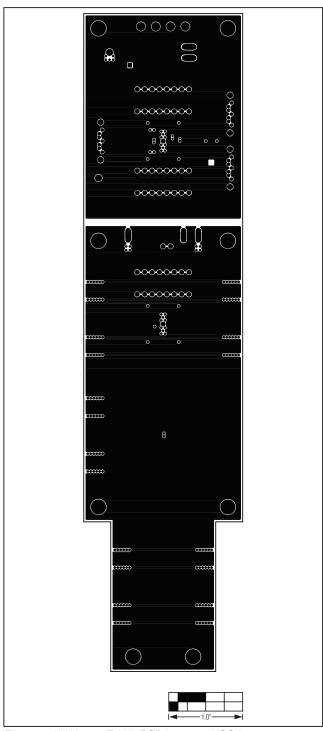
MAX4986 EV Kit PCB Layout—VCC Layer 3
